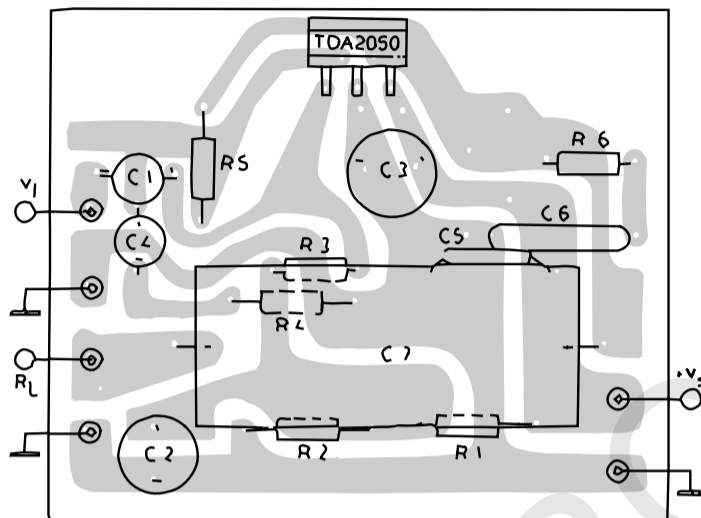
p.c. Board And Components layout Of The Circuit Of Fig. 3
